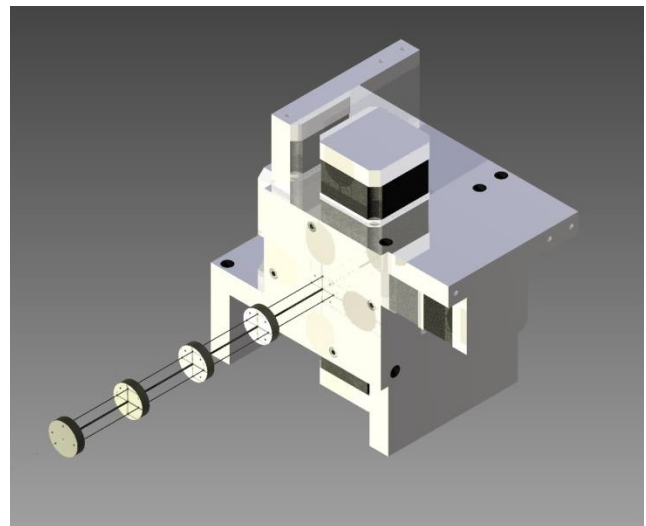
Design of a soft robotic arm is achieved and fabrication will be done in this project. The robotic arm will be adapted to integrate a magnetic system for high precision motion control of magnetic drug carriers.
